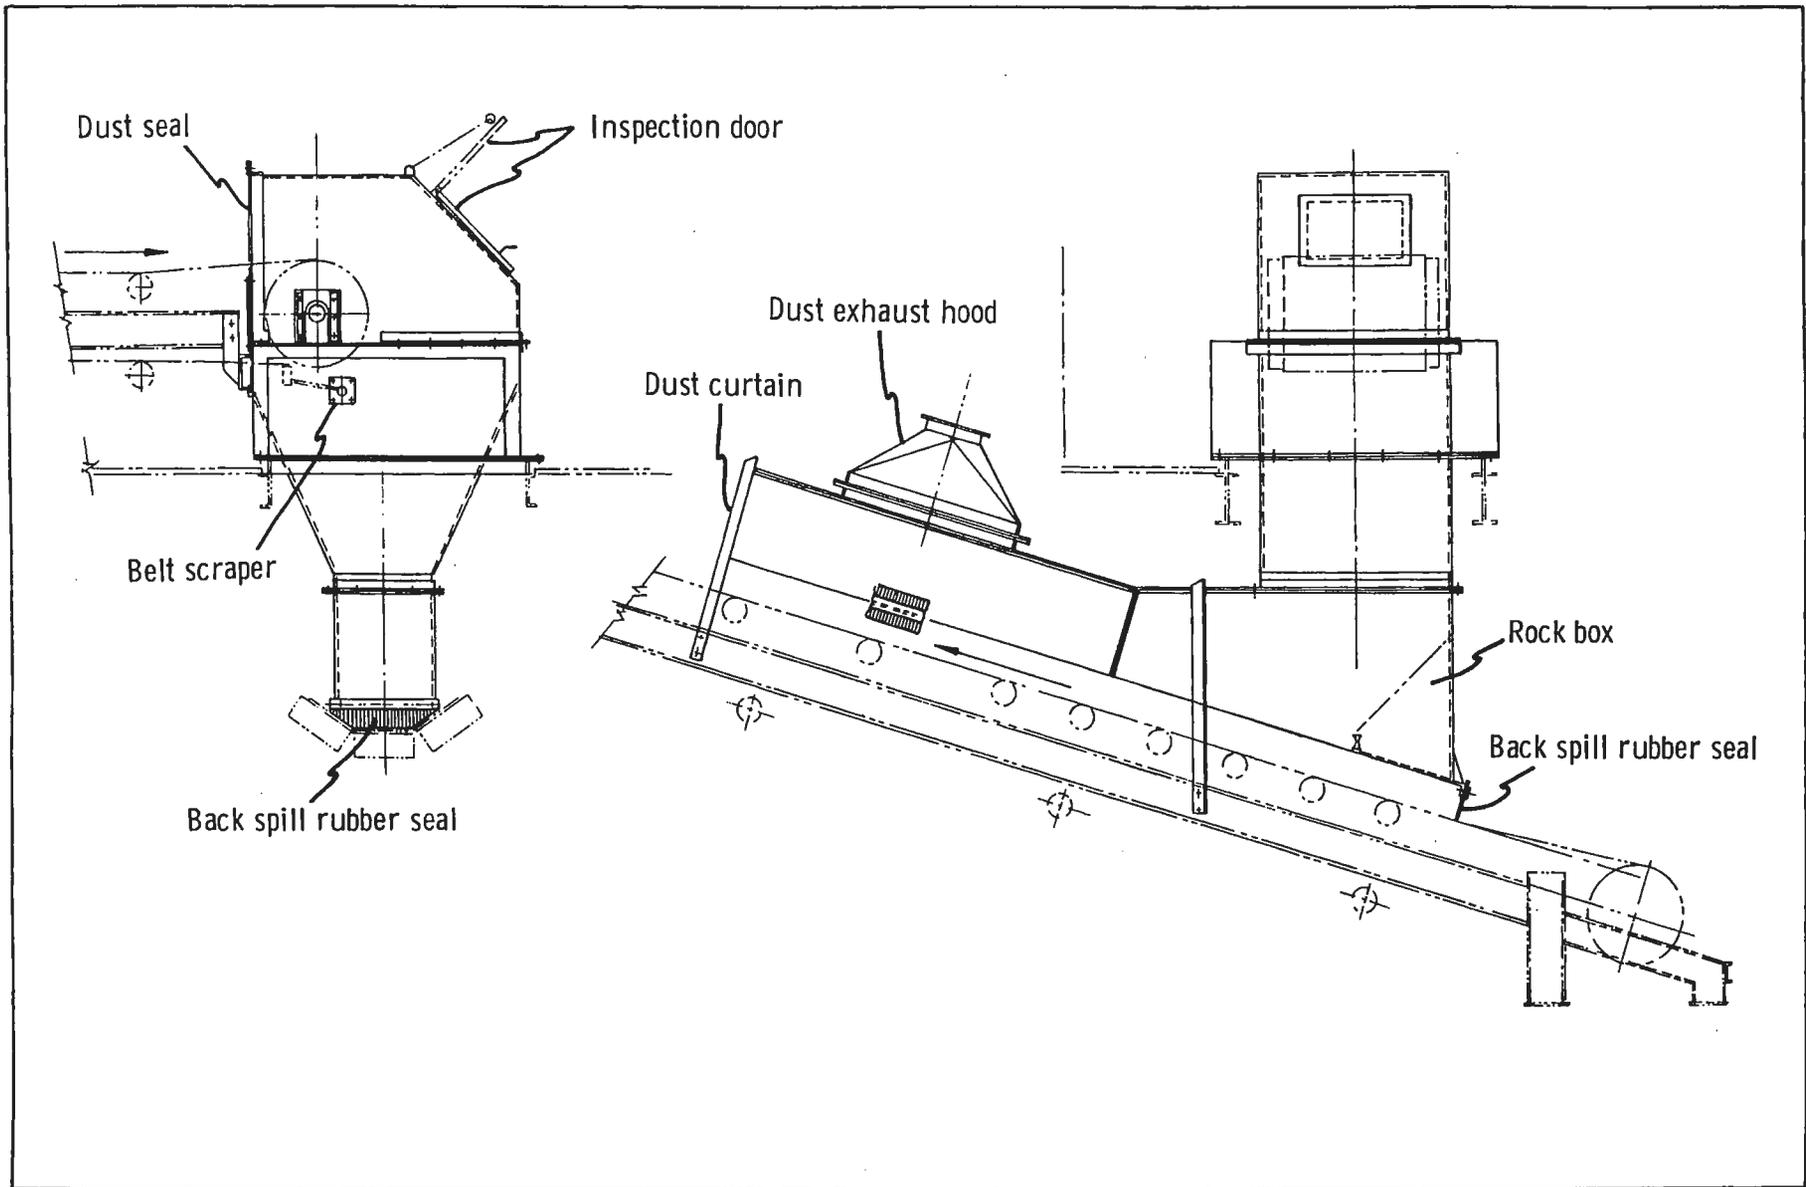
Typical enclosures at the belt-to-belt conveyor transfer point.
